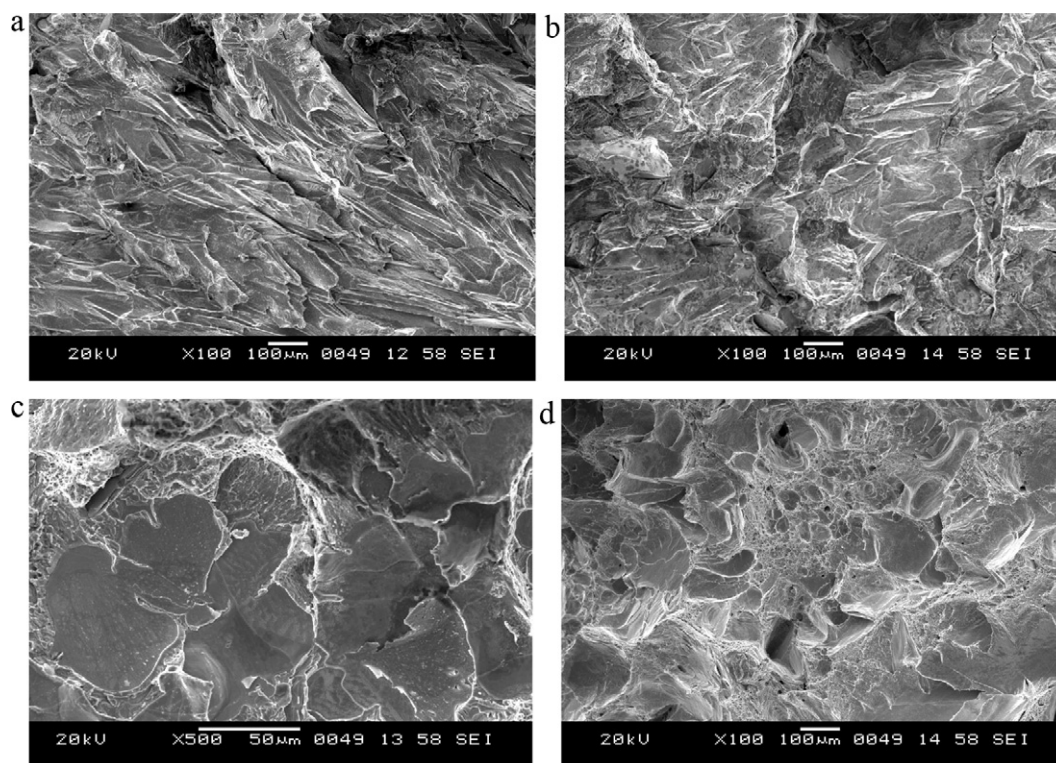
Fractured surfaces of solder specimen tested in impact at (a)  $-90^{\circ}\text{C}$  (b)  $-60^{\circ}\text{C}$  (c)  $-20^{\circ}\text{C}$  and (d)  $30^{\circ}\text{C}$  for solder solidified in copper mould samples.
